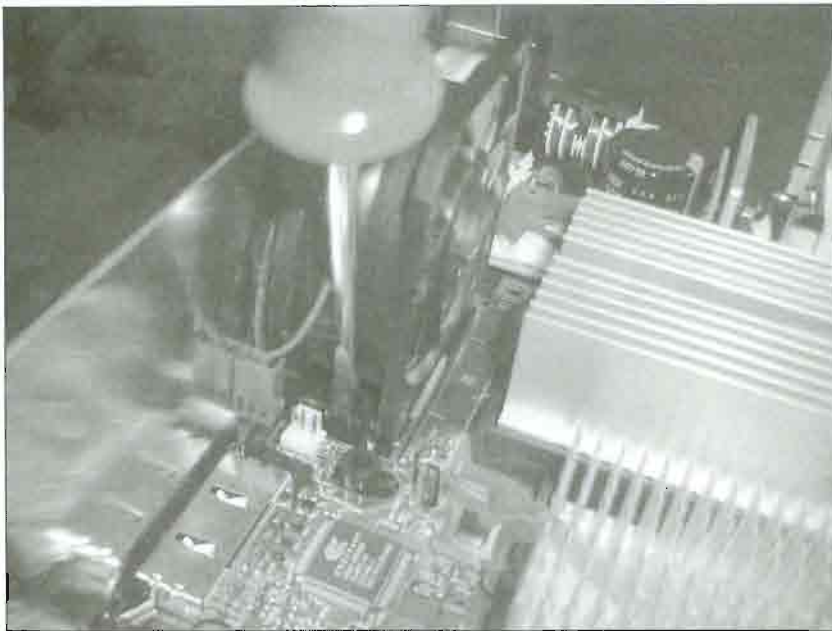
The Xbox case fan must be removed prior to removing the motherboard.
